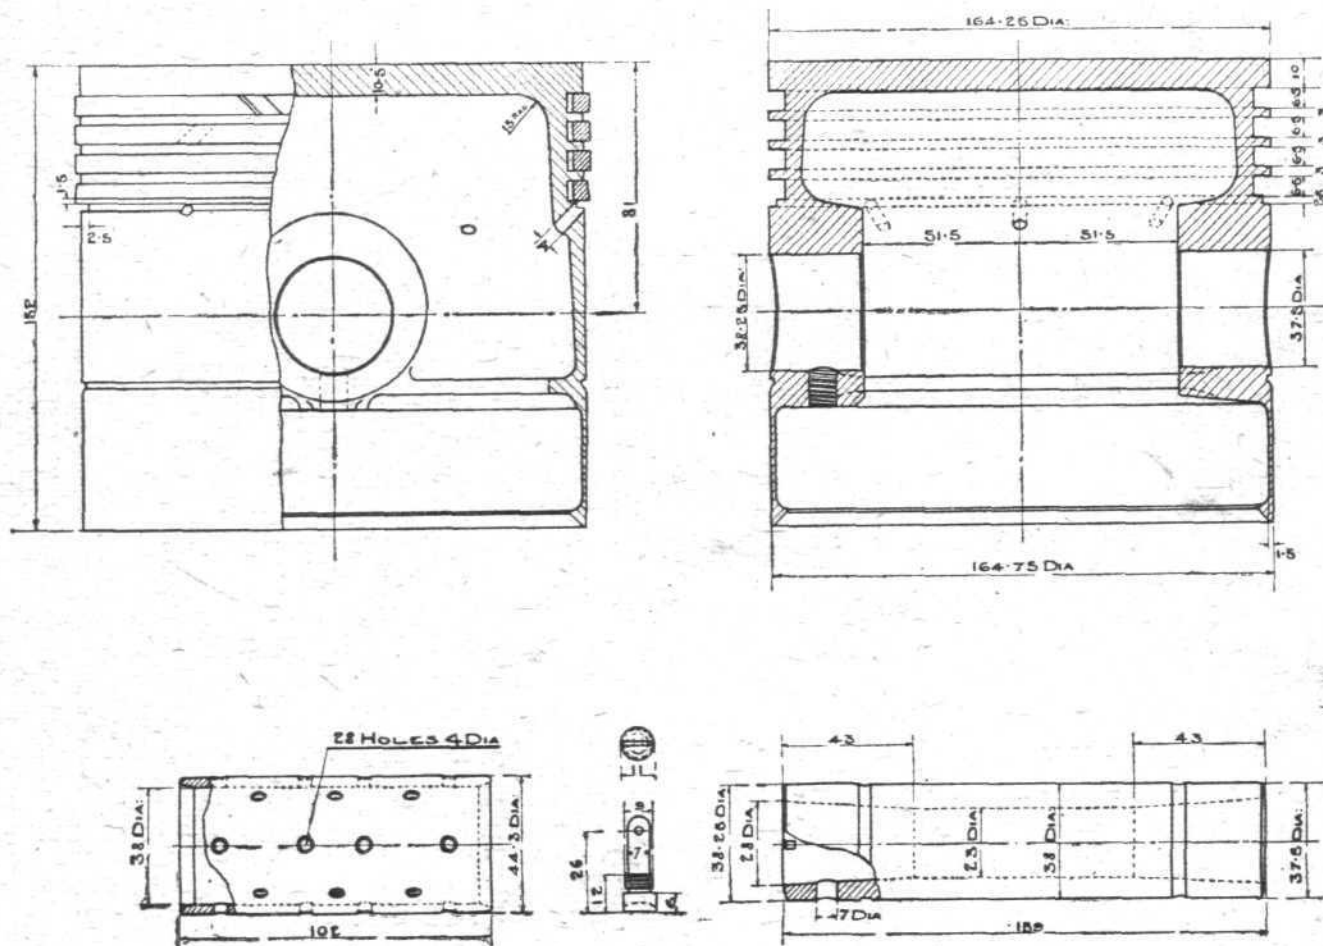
Details of pistons, gudgeon pins, and floating small-end bushes.
